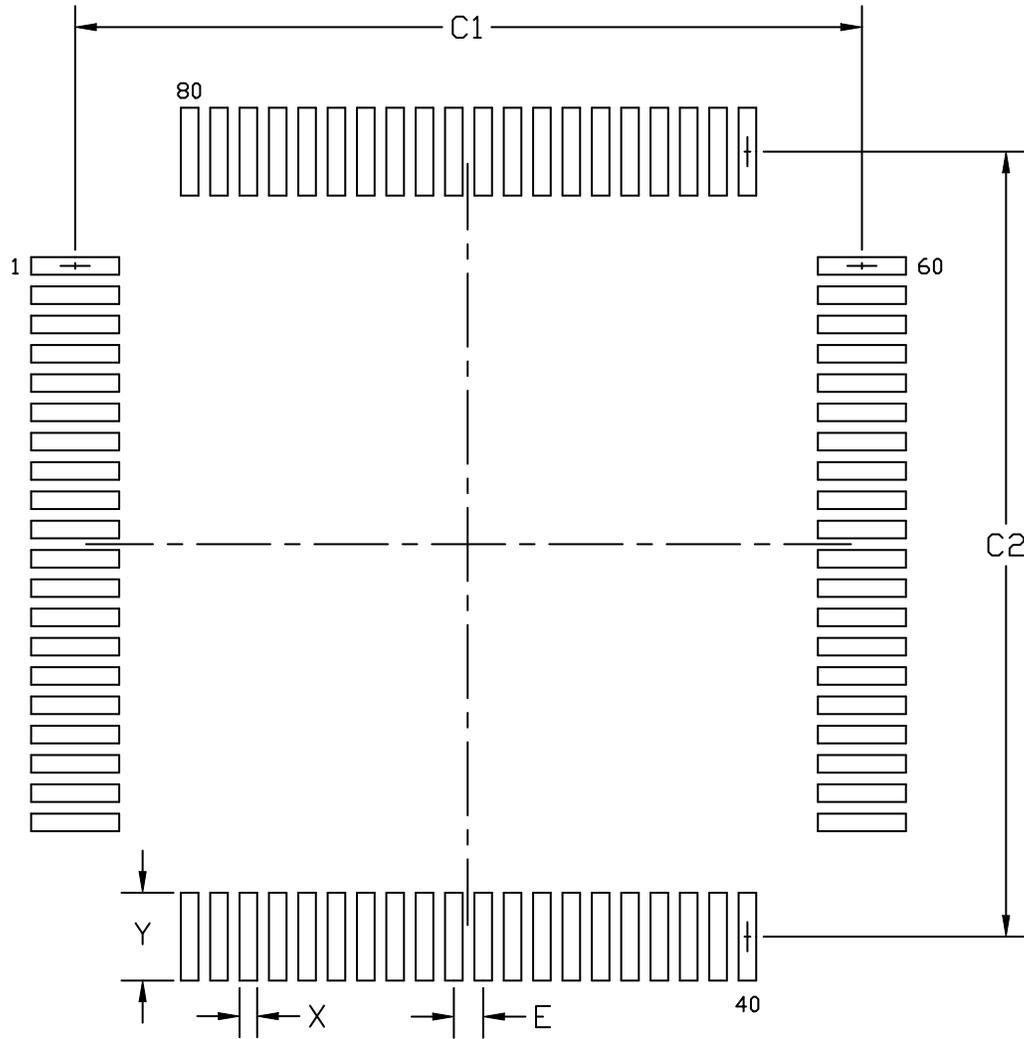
TQFP80 PCB Land Pattern Drawing
